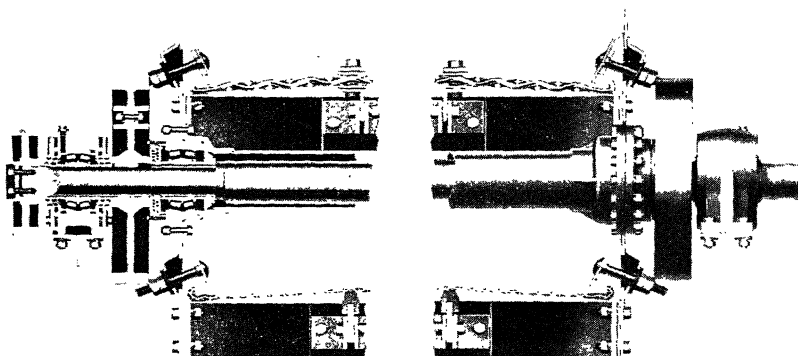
High-speed fixed-throw eccentric shaft. (Courtesy of Tyler-Niagara.)
